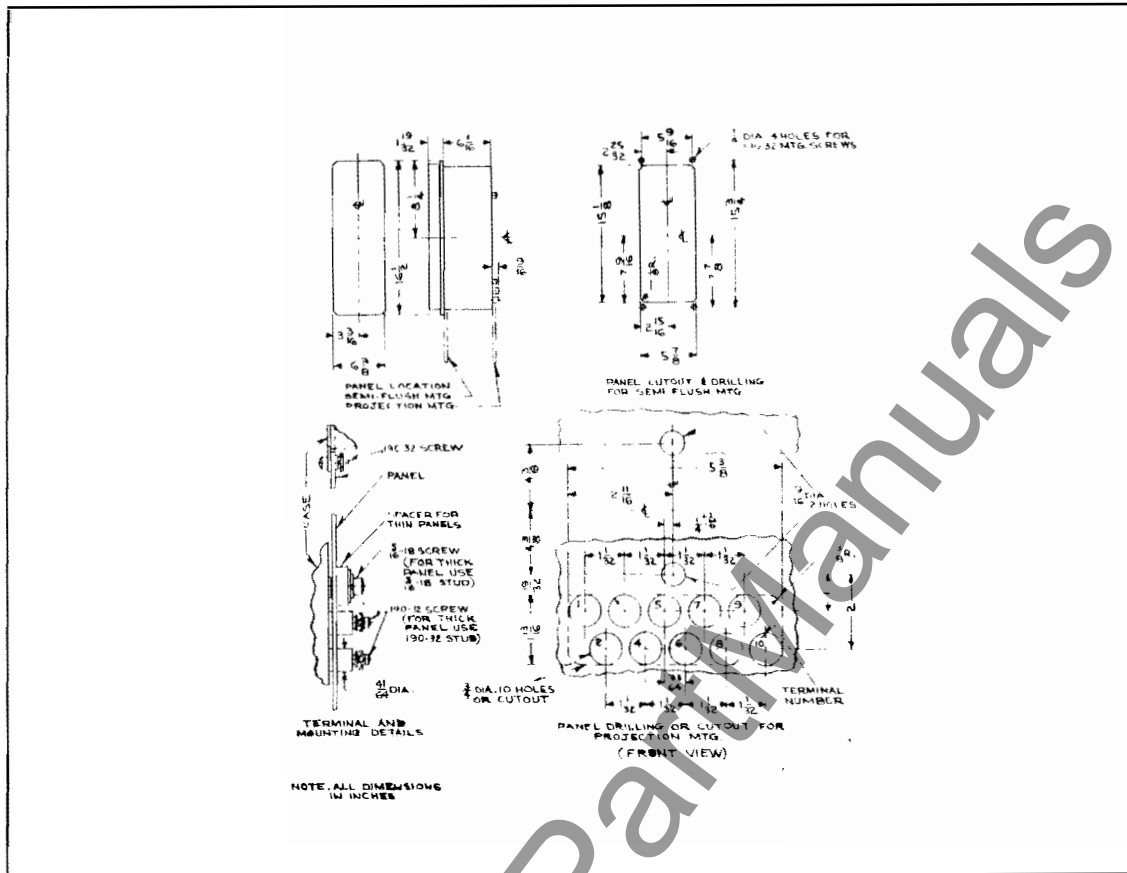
OUTLINE AND DRILLING PLAN FOR THE TYPE FT31 CASE
